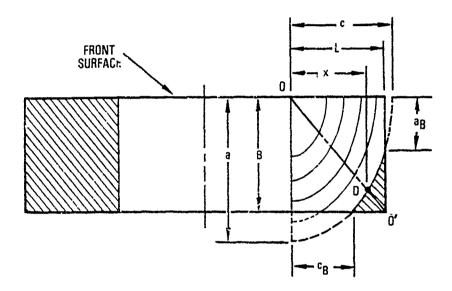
Sketch of the Extended Quarter Elliptic Corner Crack, Intersecting the Back and Outer Surfaces of the Lug
